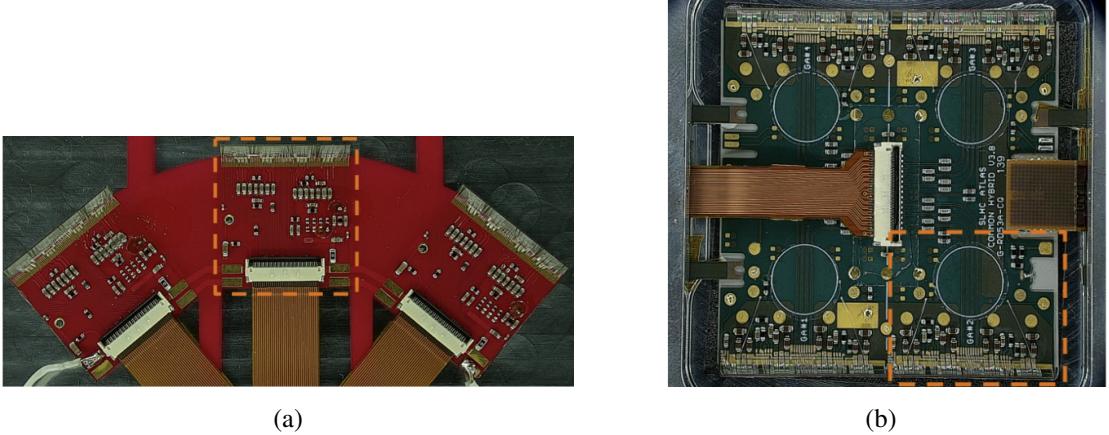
a) A triplet module attached to flexible PCB. This module consists of three sensors each with one FE chip attached. The orange lines encapsulate one sensor chip and one FE chip. b) A quad module. Here, four FE chips are bump-bonded onto one large sensor chip. The orange region shows where one FE chip is attached to the larger sensor chip.
